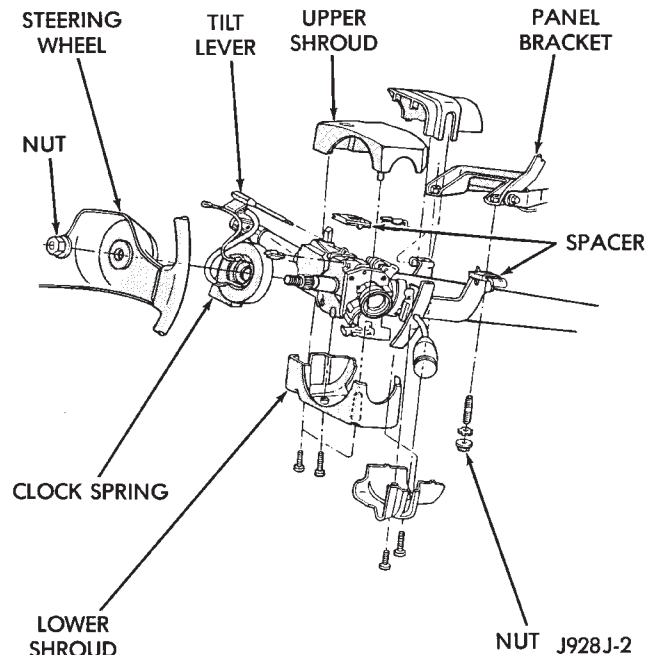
Steering Column Shrouds Remove/Install - Typical
